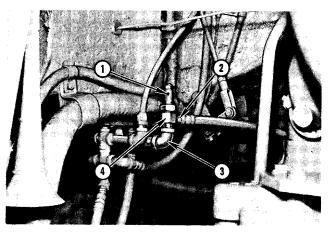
AIR COMPRESSOR GOVERNOR
